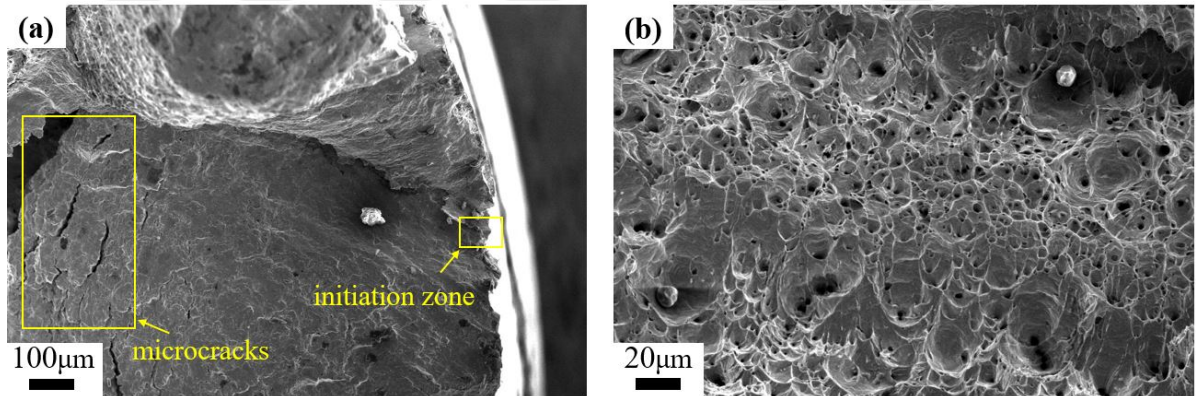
The fatigue fracture surface of condition R 316L sample broken in 31.956 cycles, at 95% of σ_{yield} (a) crack initiation zone, (b) Final rupture zone.
